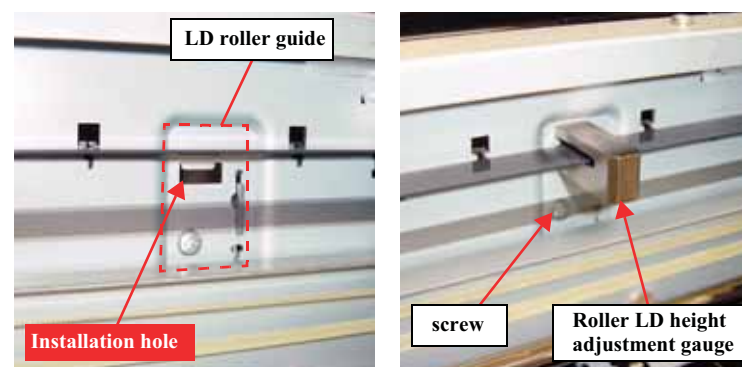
Setting the Roller LD Height Adjustment Gauge
